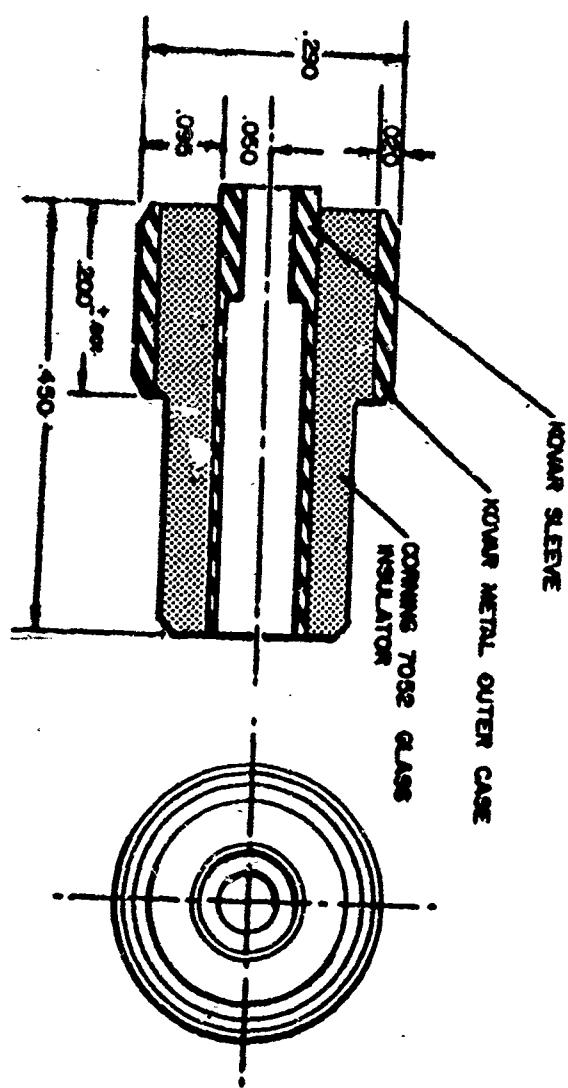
Drawing 3595, Glass-to-Metal Seal Header.
